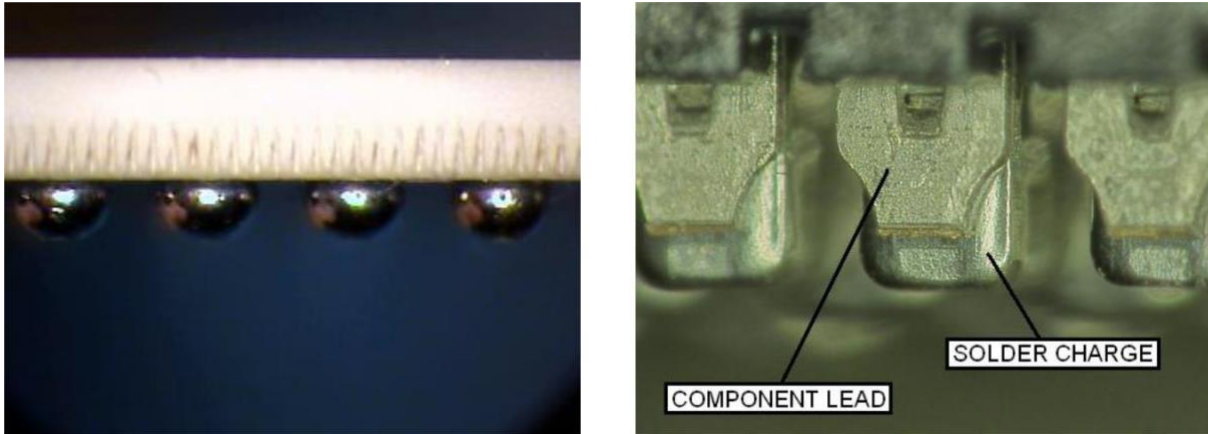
Solder Balls on BGA v. Solder Charges on SEAX8
